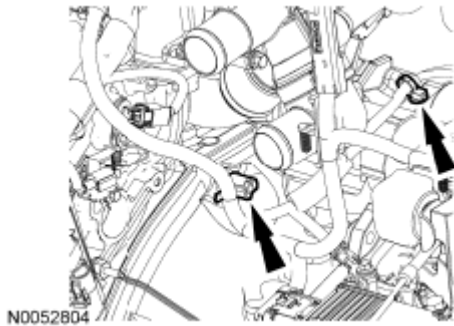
Locating Transaxle-To-Engine Stud Bolt & Starter
